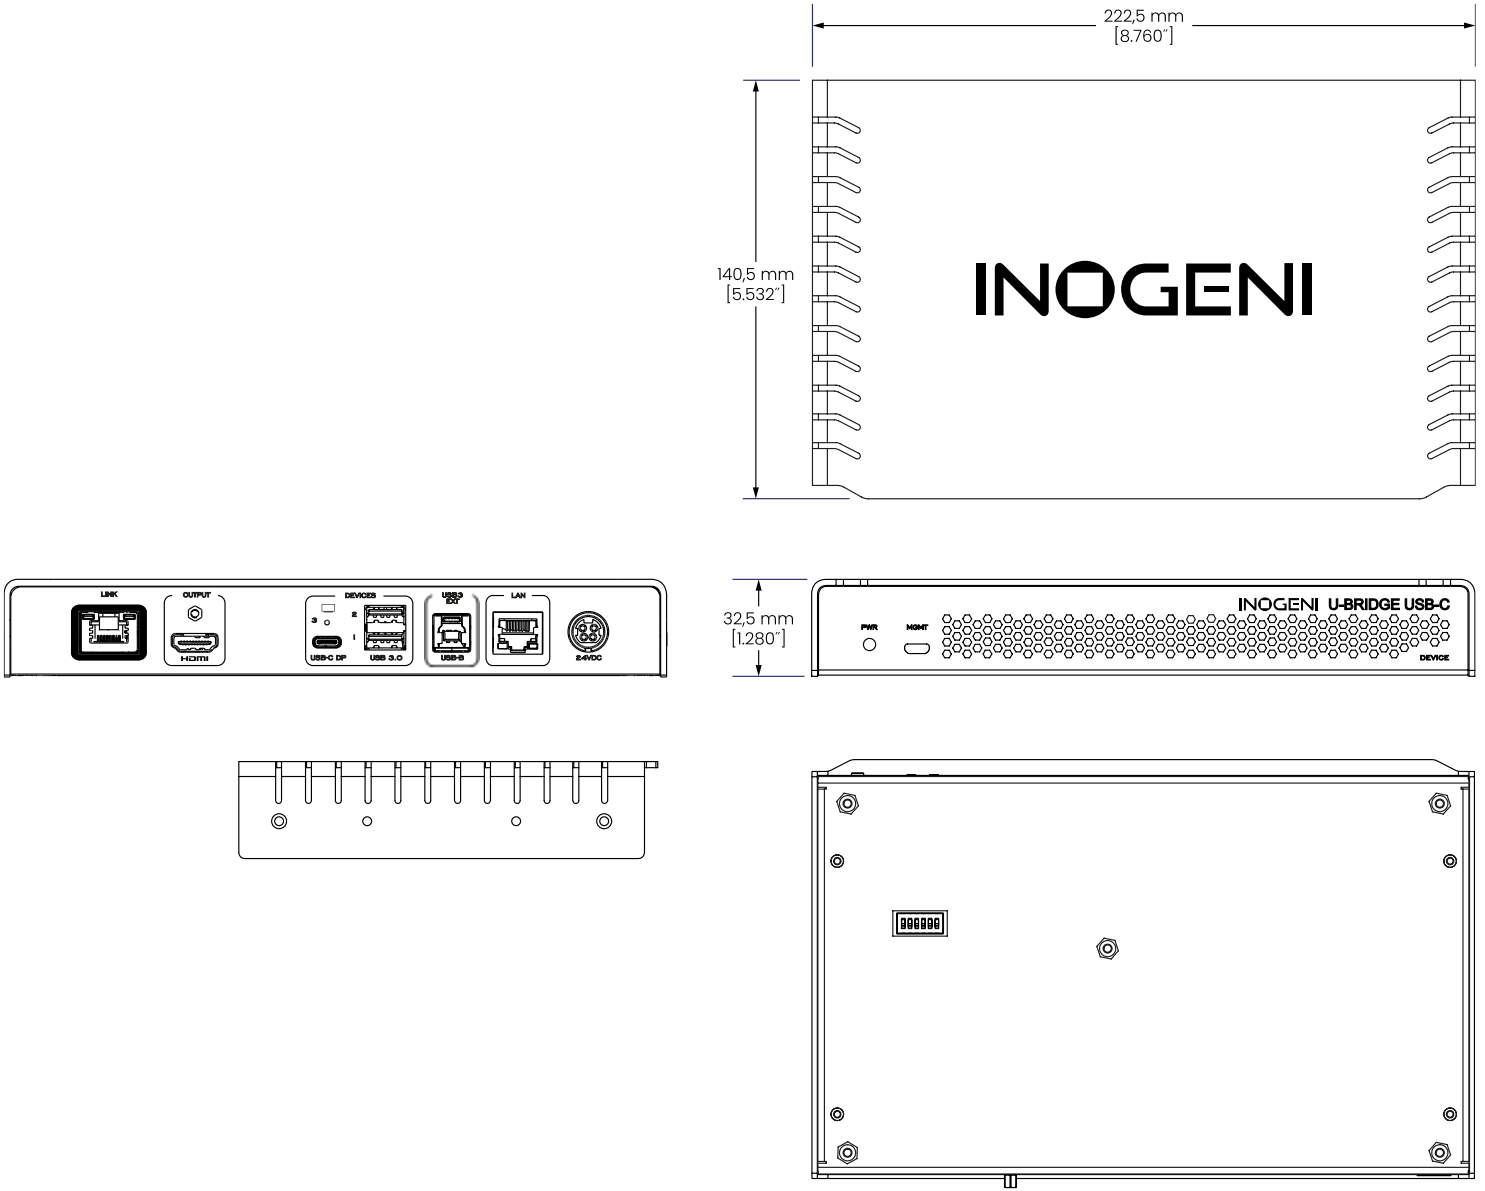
Bottom plate dimensions and holes positions of DEVICE hub – SINGLE variant
